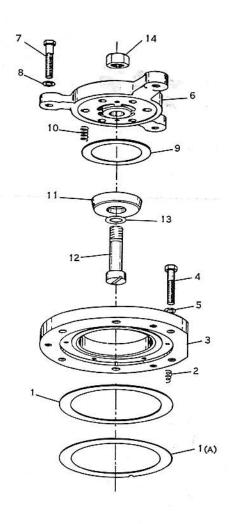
Oil Pump, Bearing Head and Oil Pressure Regulating Valve
